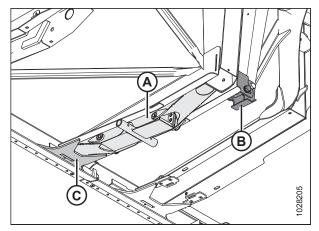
Inboard Arm Assembly Installed in Left Header Leg – View from Below
